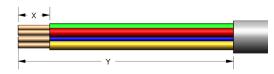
Jacketed Auxiliary Cable Stripping Dimensions
